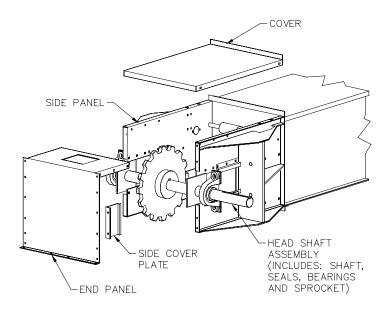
B, 26" Head Shaft Removal and Reinstallation
